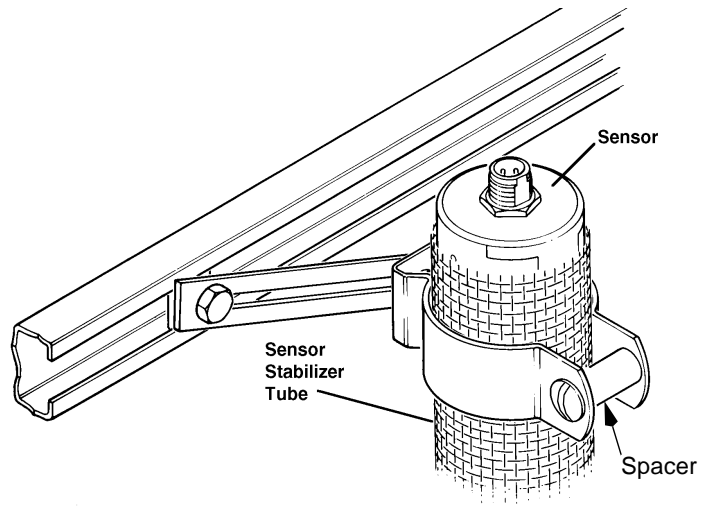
Mounting the Sensor with the Sensor Stabilizer Tube.
